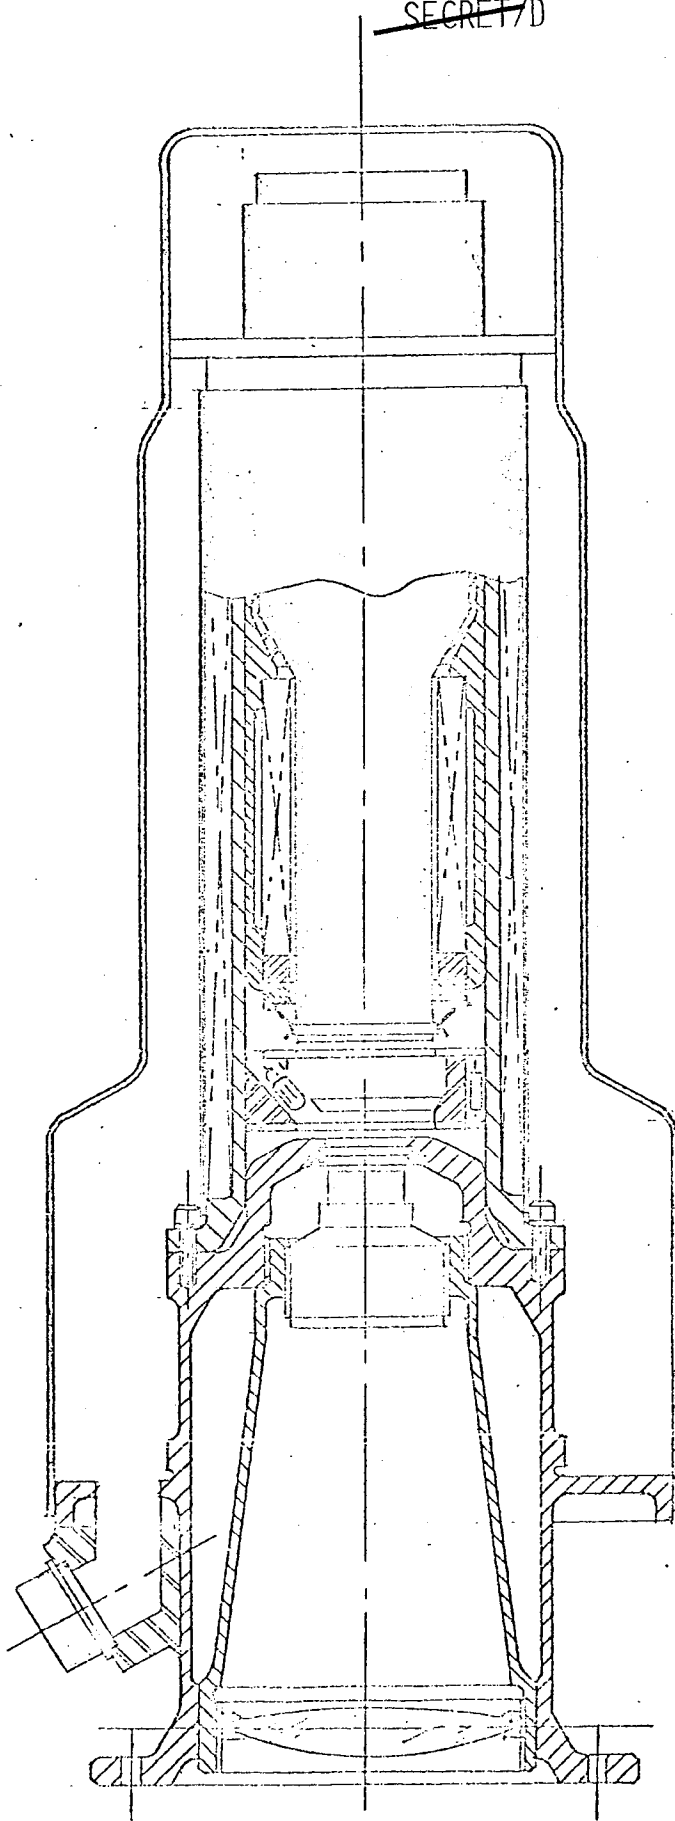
Proposed Sensor Assembly with Mounting Adapter
